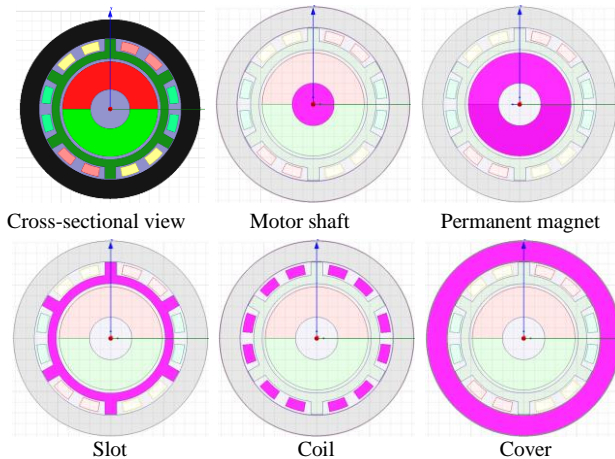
Locations of the key parts in the cross-section of the reference stator and rotor.
